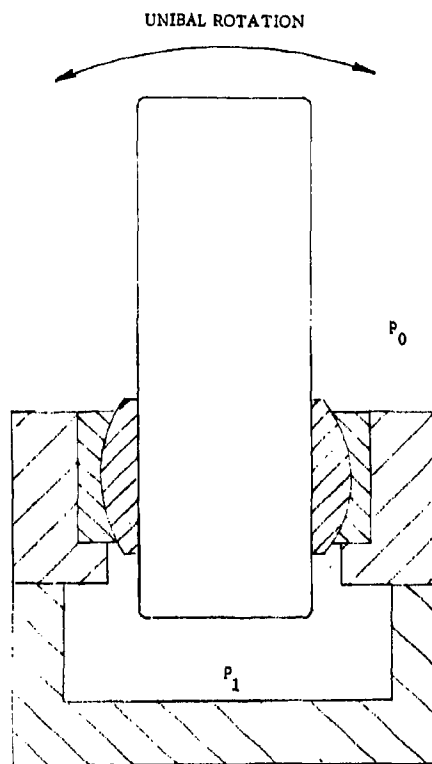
BALL JOINT TEST SET-UP (EXPLODED VIEW)
